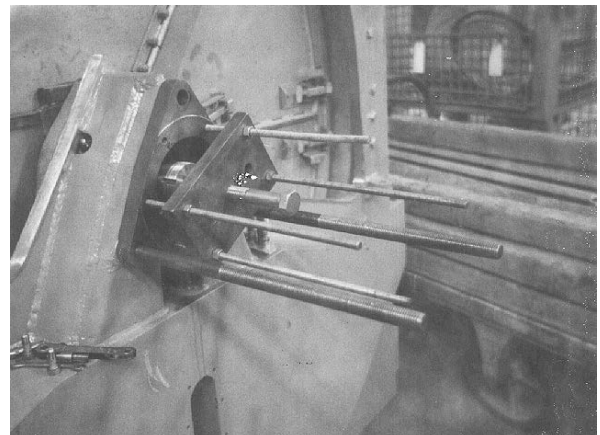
Connection From Hydraulic Pump to Assist in Bearing Removal
